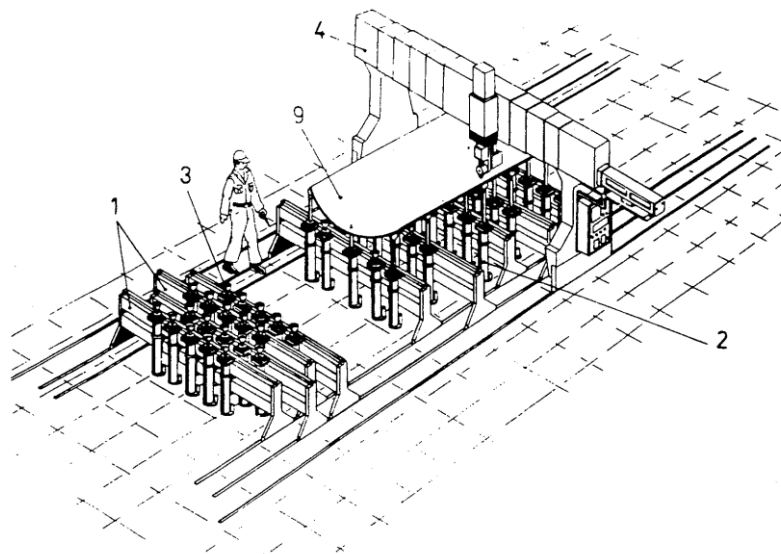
Machine tool installation for supporting and machining workpieces [1]
